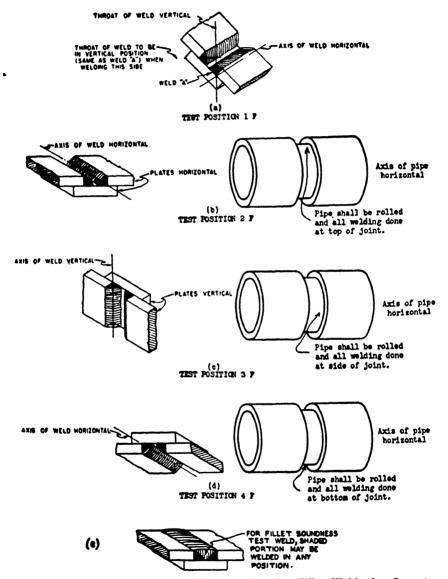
Positions for test plates or pipe for Fillet Welds for Operator Qualification
